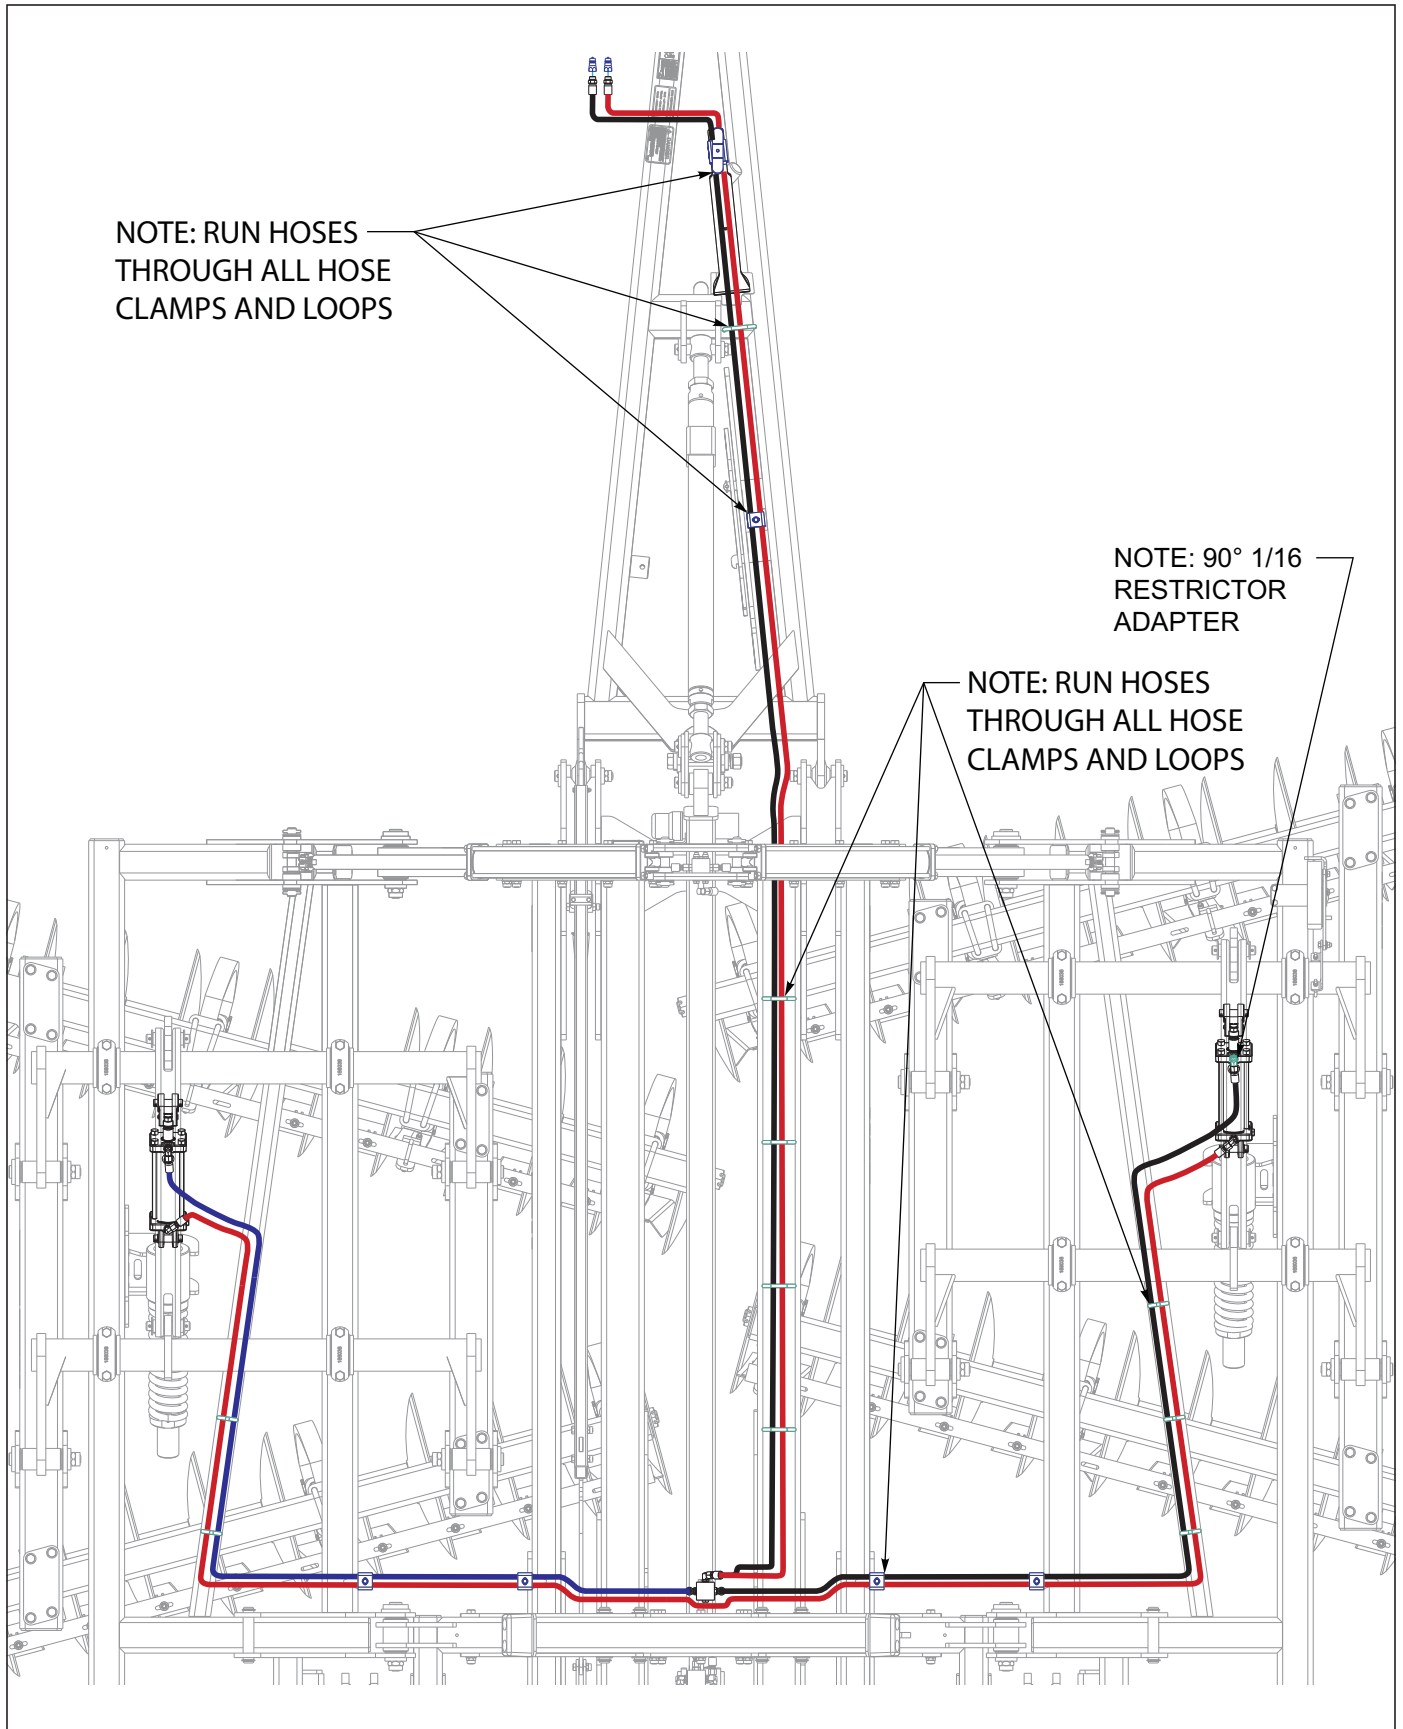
Hydraulic Gang Lift Layout 2411AFG-07-09
